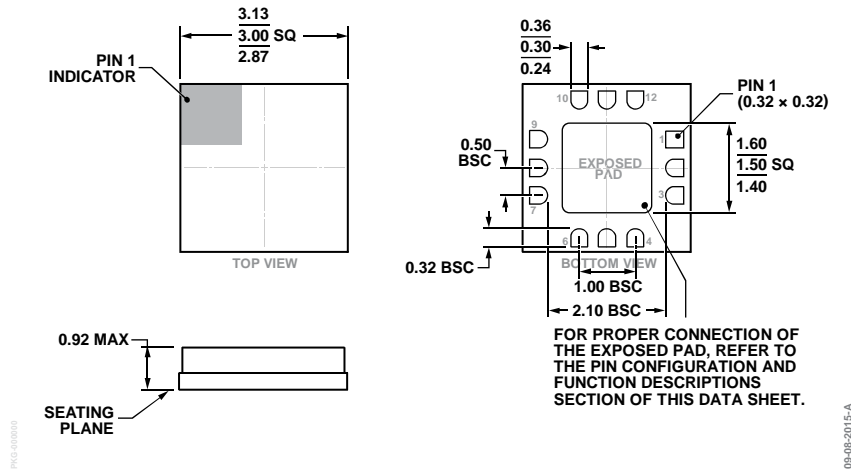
12-Terminal Ceramic Leadless Chip Carrier [LCC] (HE-12-1)
